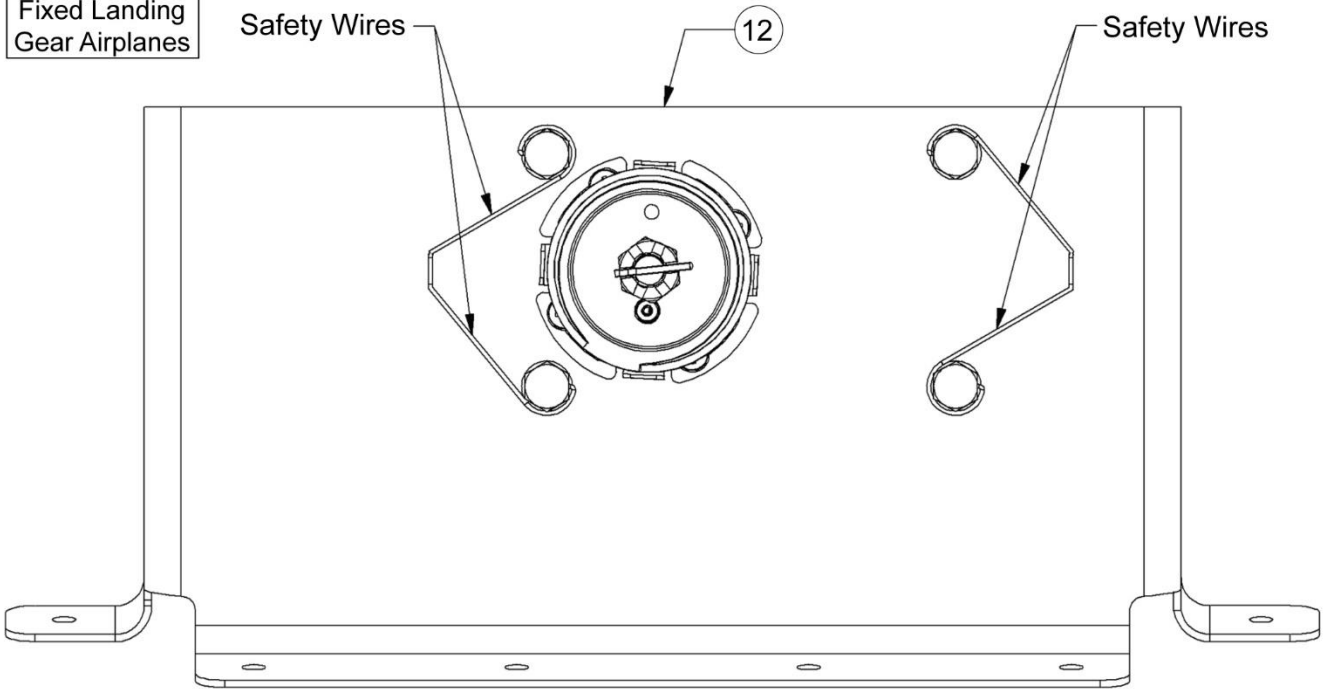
Example of Safety Wiring Pitch Servo Bolts
